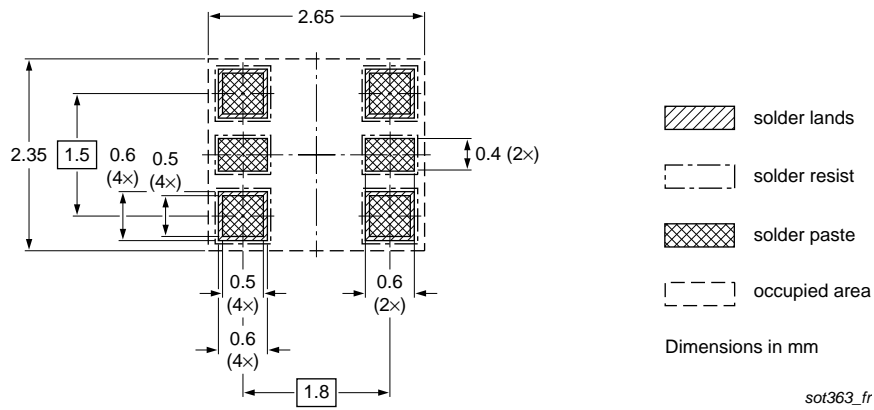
Reflow soldering footprint for SOT363 (SC-88)
